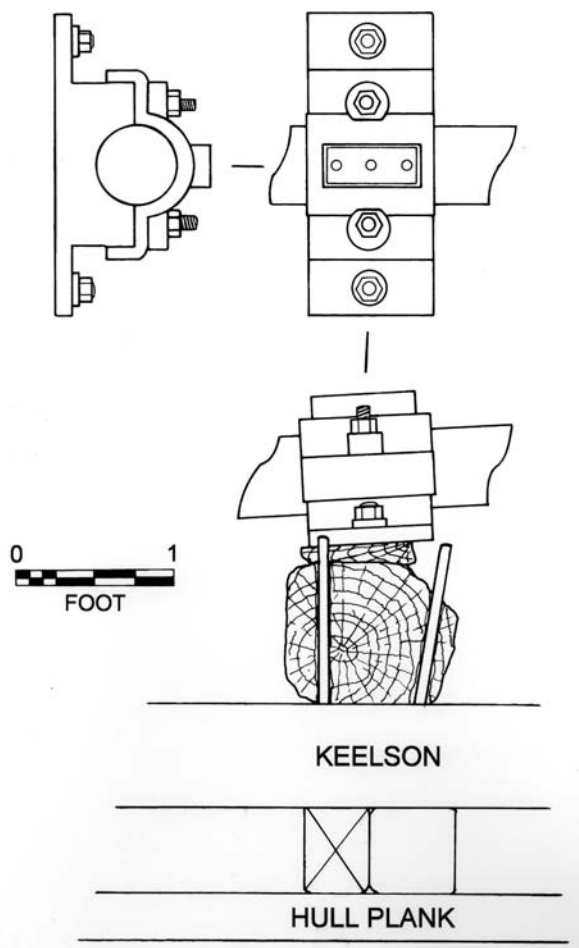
Plan, elevation, and end views of forward propeller shaft bearing. Drawing by Jim Bradford
